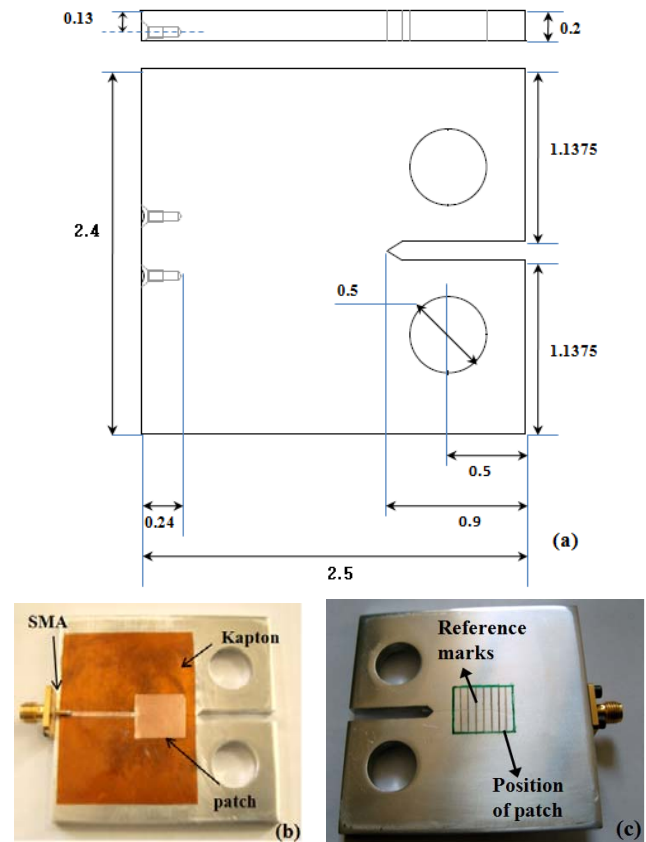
Fatigue specimen; (a) Specimen design (units in inches); (b) Antenna sensor and SMA assembly; (c) Reference marks on back side of specimen.
